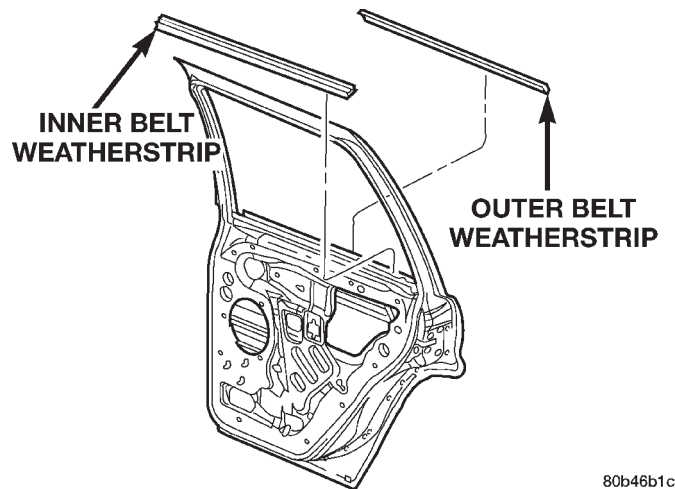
Rear Door Inner/Outer Belt Weatherstrip
